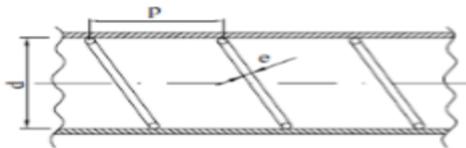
Helical Wire Coil Fitted Inside A Smooth Tube
